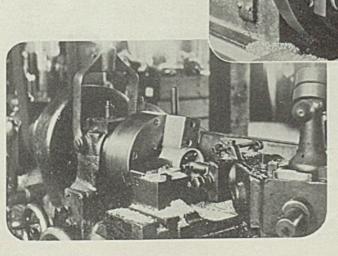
(left)—Facing end and boring out inside of the skirt of a piston in a turret lathe
